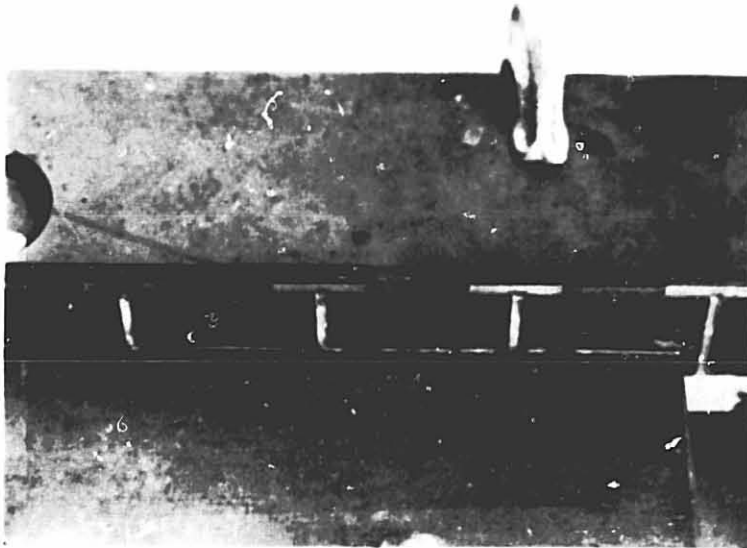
TUBE BURNOUT - SPECIMEN 1
